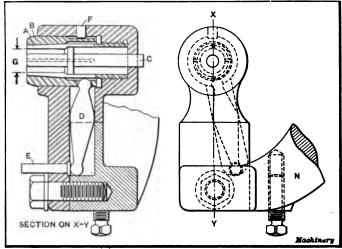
Standard Work-holder used in Connection with the Burring Attachment
